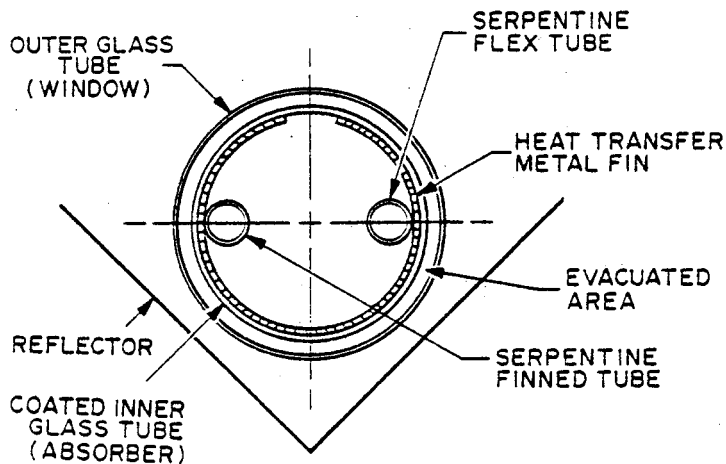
Cross-sectional View of GE Vacuum Tube Solar Collector
